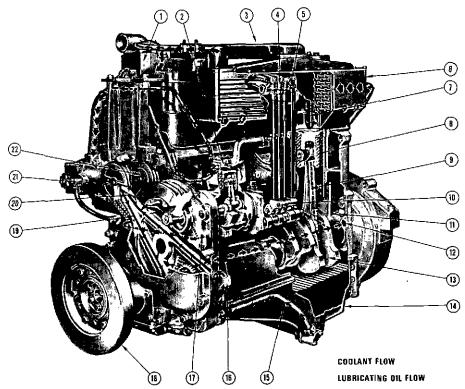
, (LWC-25). Lubricating oil and coolant flow - FFC (NTC Series)
